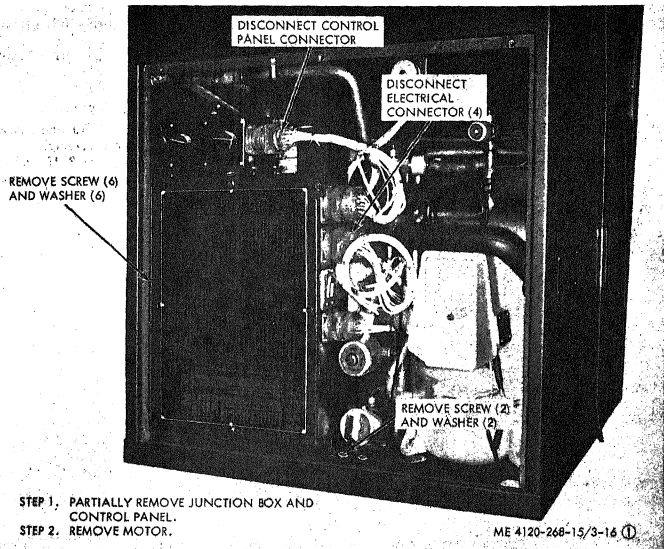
Condenser fan motor, removal and installation (Sheet 1 of 2).
